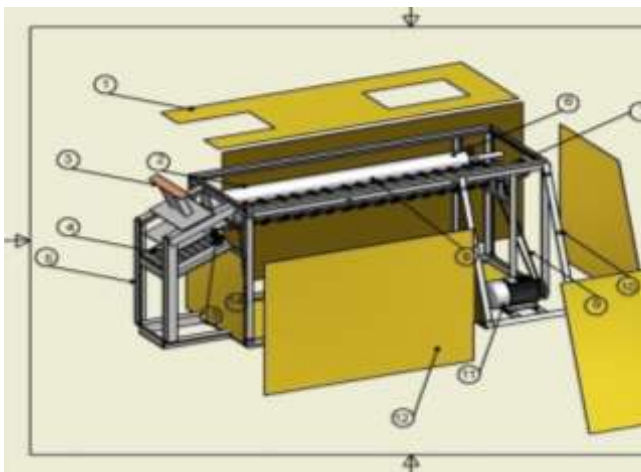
An Exploded View of the Yam Peeling and Slicing Machine
